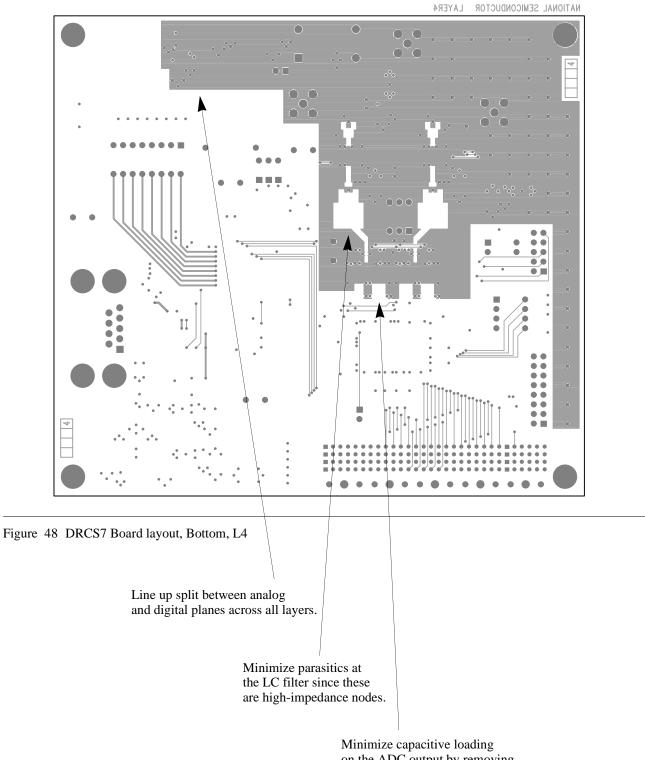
, Figure 46, Figure 47, and Figure 48 show the DRCS7 Board parts placement and PC board layers. PCB layout tips are annotated on the plots.
